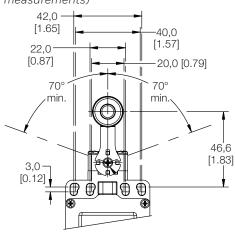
GXE Series Side Rotary Adjustable Dimensions mm [in] (refer to Figure 6 for additional
